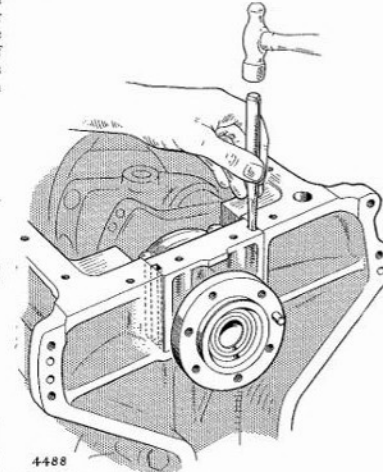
Packing the crankshaft rear main bearing cap grooves with felt
